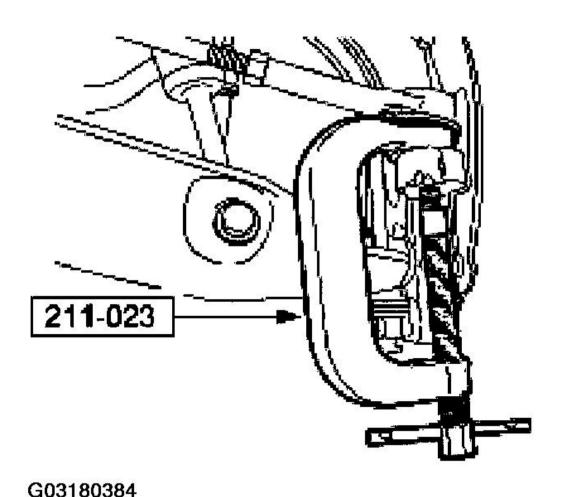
Separating Tie-Rod End From Wheel Knuckle Courtesy of FORD MOTOR CO.
